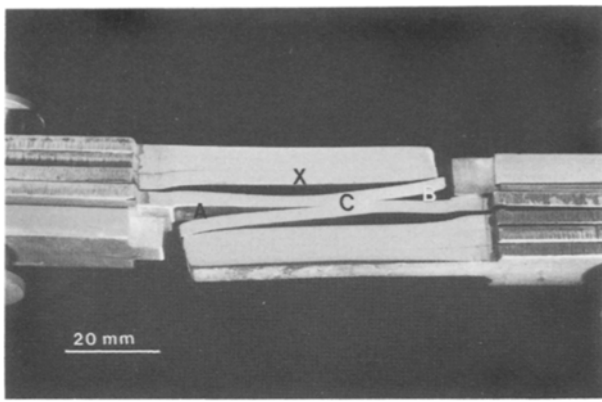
Edge view of thick Type 2 single overlap diffusion-bonded test piece after fracture.
